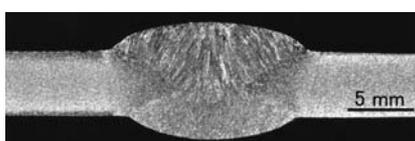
Macroscopic profiles of G-50 / US-36 in a double-side single-pass weld (6-mm thick mild steel base metal; I-butt joint; 4-mmØ wire; 450A-33V-650 mm/min for 1st pass; 550A-33V-700 mm/min for 2nd pass).
